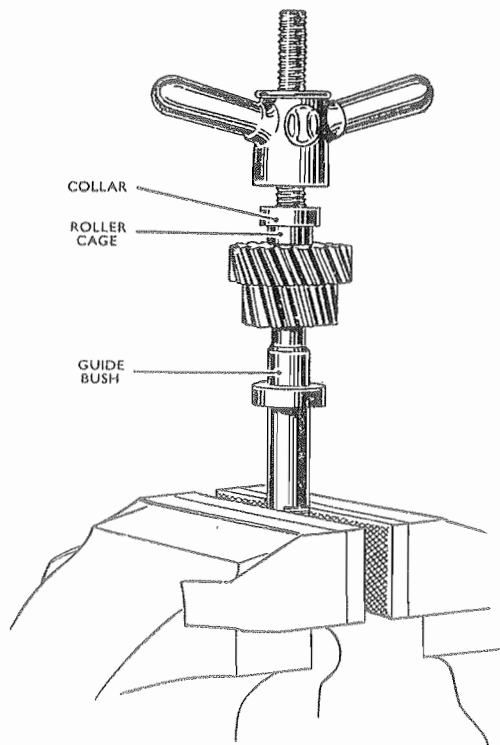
FITTING FIRST DRAWN CUP NEEDLE BEARING
